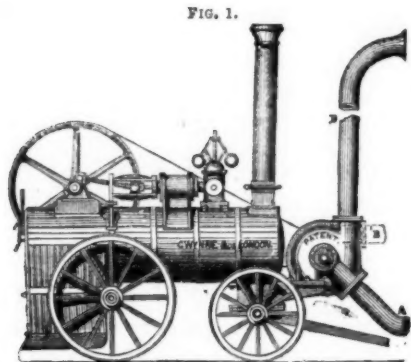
PATENT PORTABLE PUMPING ENGINE, WITH PUMP FIXED TO ENGINE; made in all sizes.
